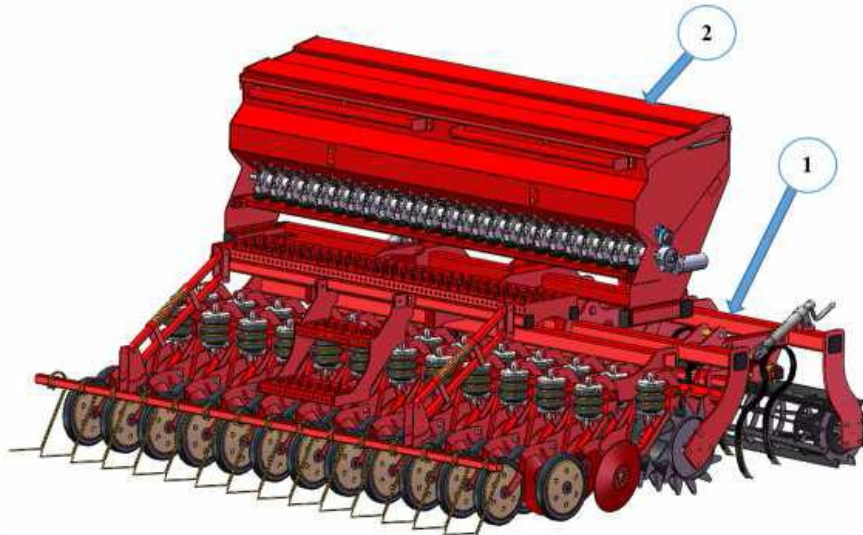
and-sowing combined machine with a mechatronic control system: 1- tilling-sowing aggregator, 2- seeder [1]
